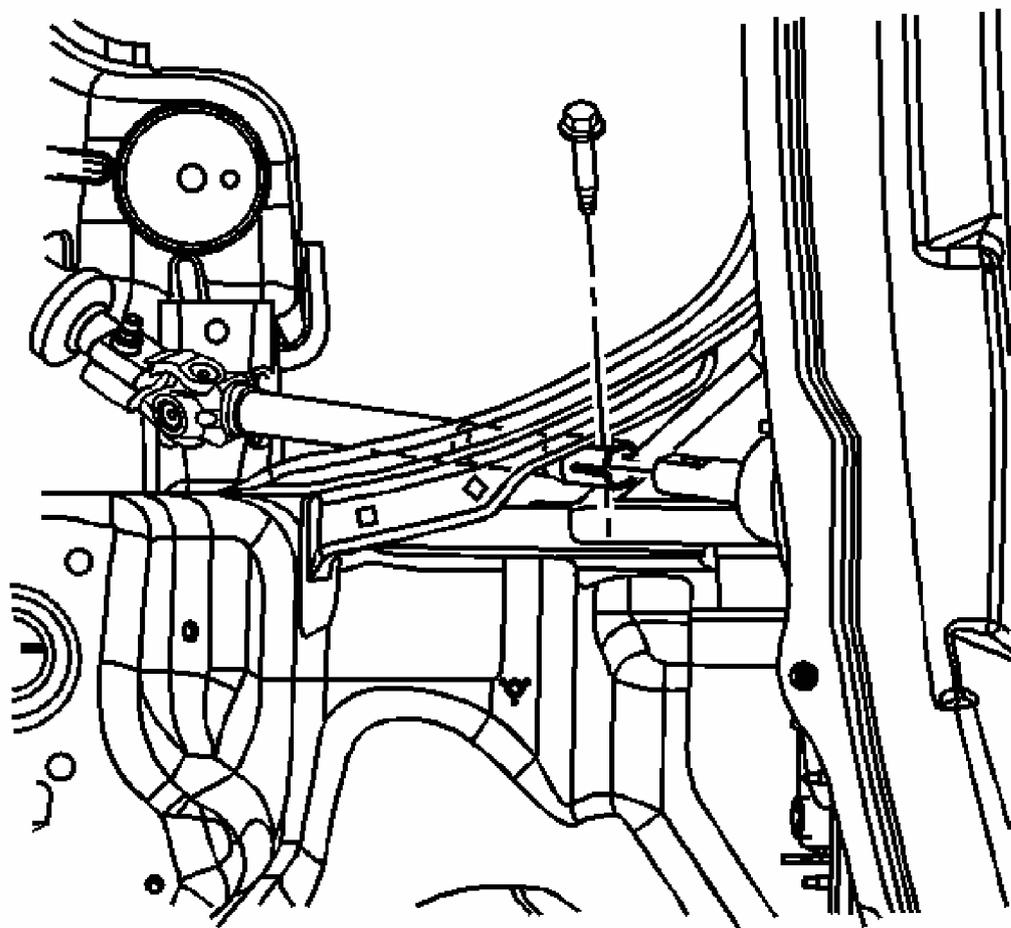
View Of Oil Pump & Mounting Bolts
